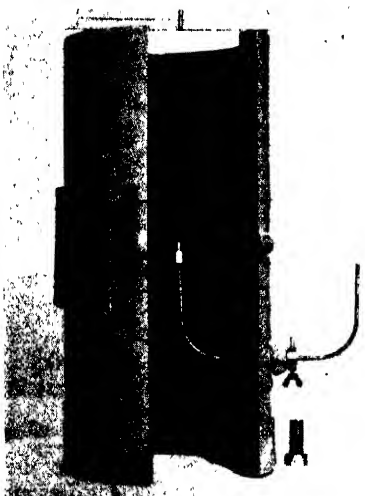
PIPE SECTIONED TO DEMONSTRATE THE INSPECTION OF A WELD BY GAMMA RADIOGRAPHY (*Aiton & Co., Ltd.*)
